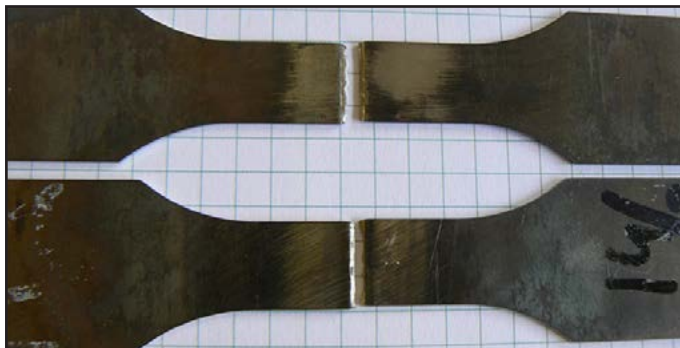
Photographs of the exemplary laser-beam welded specimen after the tensile strength test – rupture in the weld
